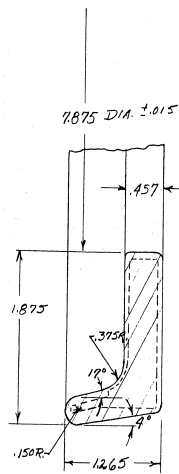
P/N 226963 - Rear Flange, Rear Main Bearing Support Cone Assy, Material Ti-A 70
